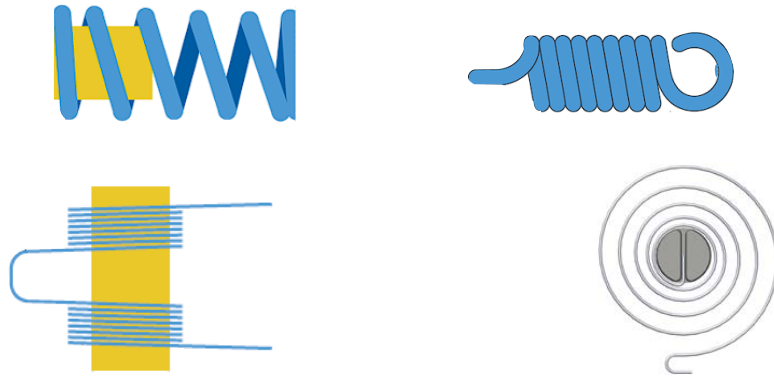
Morphology of the four families of springs. Top left : compression; top right : traction; bottom left : double torsion; bottom right : clock.
